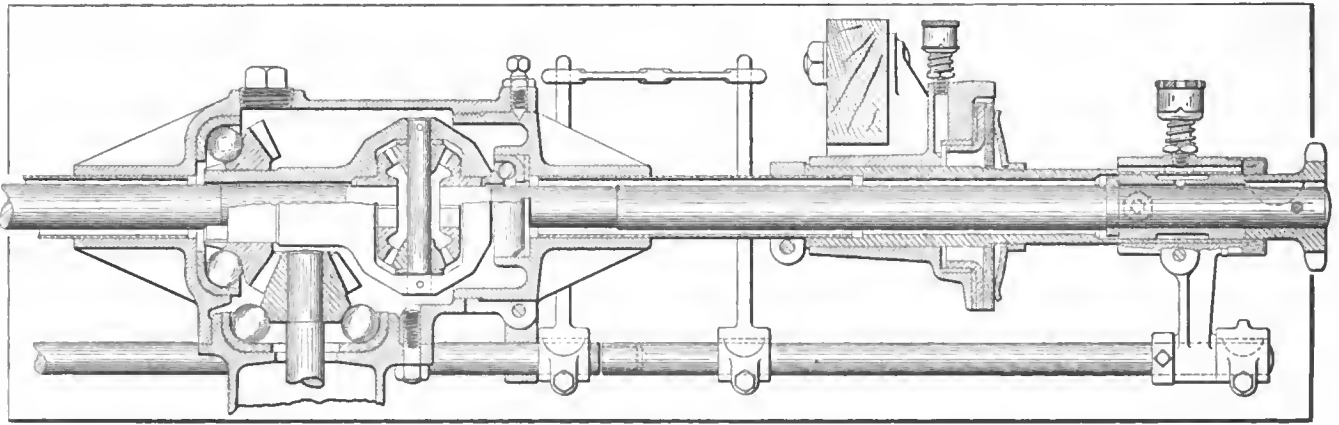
Depleting jackshaft in section with differential and large ball bearings for the bevel drive
